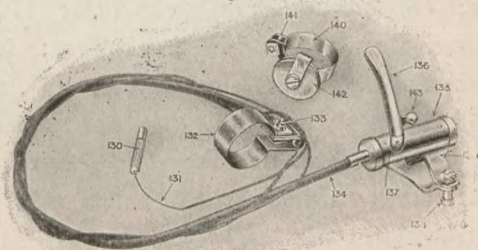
Sturmev-Archer Top Tube Control Parts
